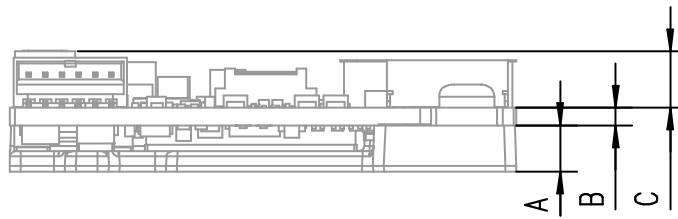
FETK-S1.1 Dimensions - Side View
